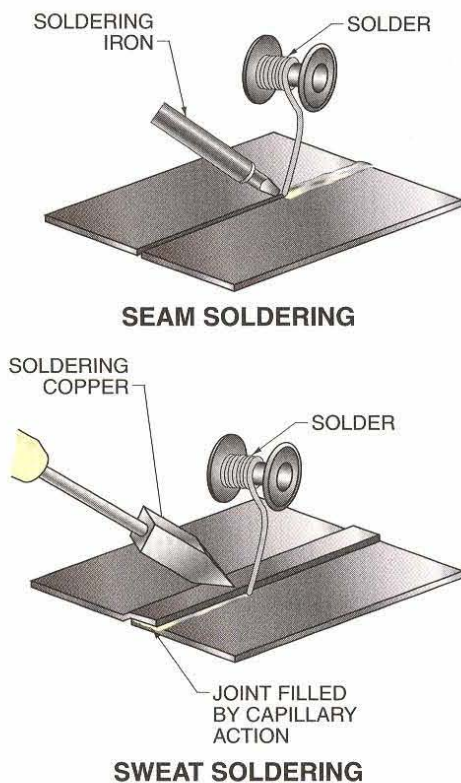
In seam soldering, a layer of solder runs along the outside edge of the joint. In sweat soldering, two pieces are joined without any solder being visible.
